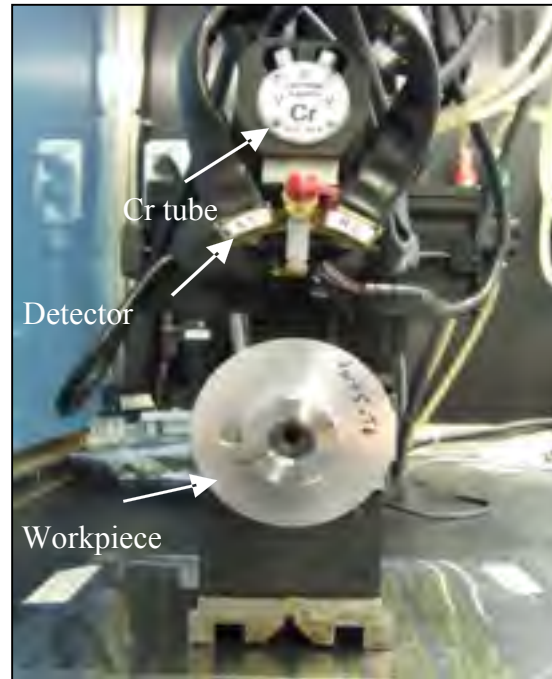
Setup for residual stress using Proto iXRD[®] machine
